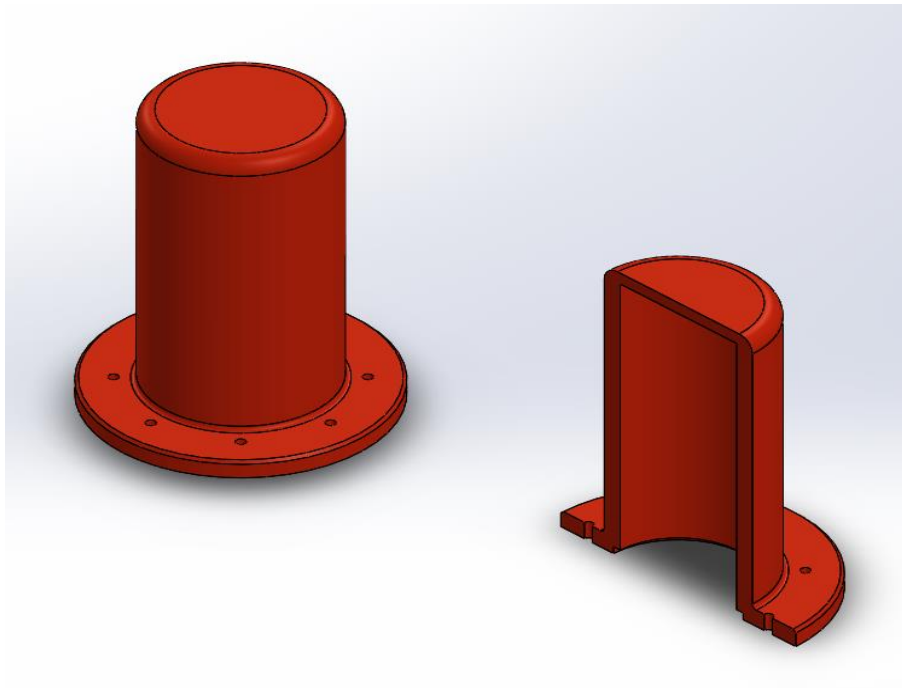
Schematic drawing of displacer cylinder designed in the SolidWorks environment
